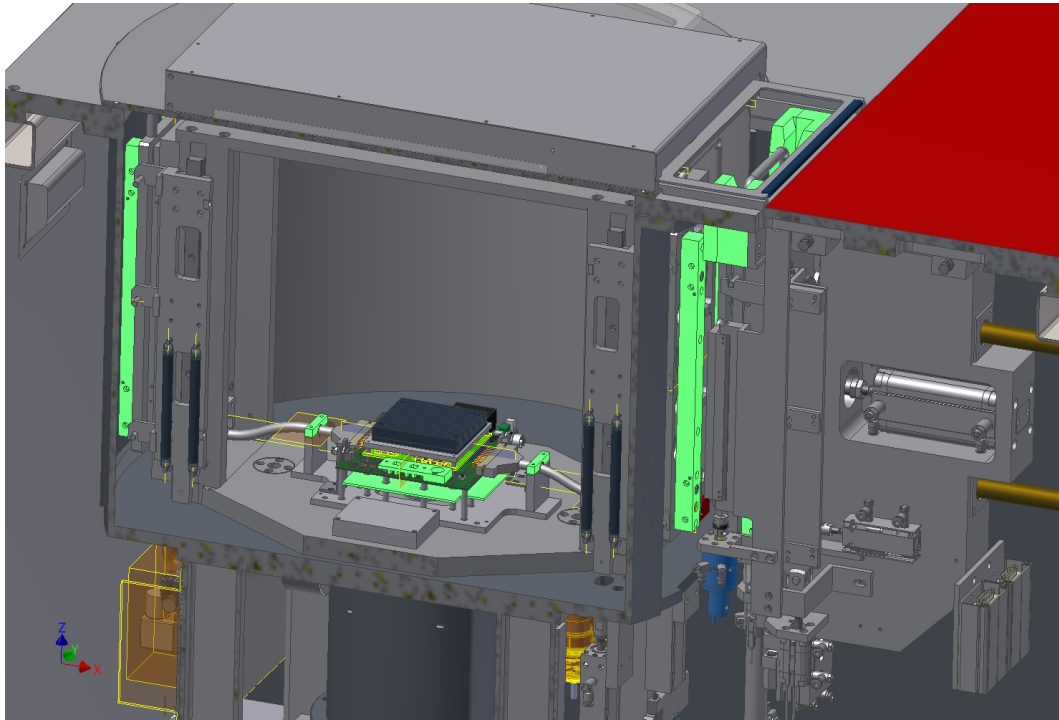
Cut-away view of the centrifuge with the contained boards
